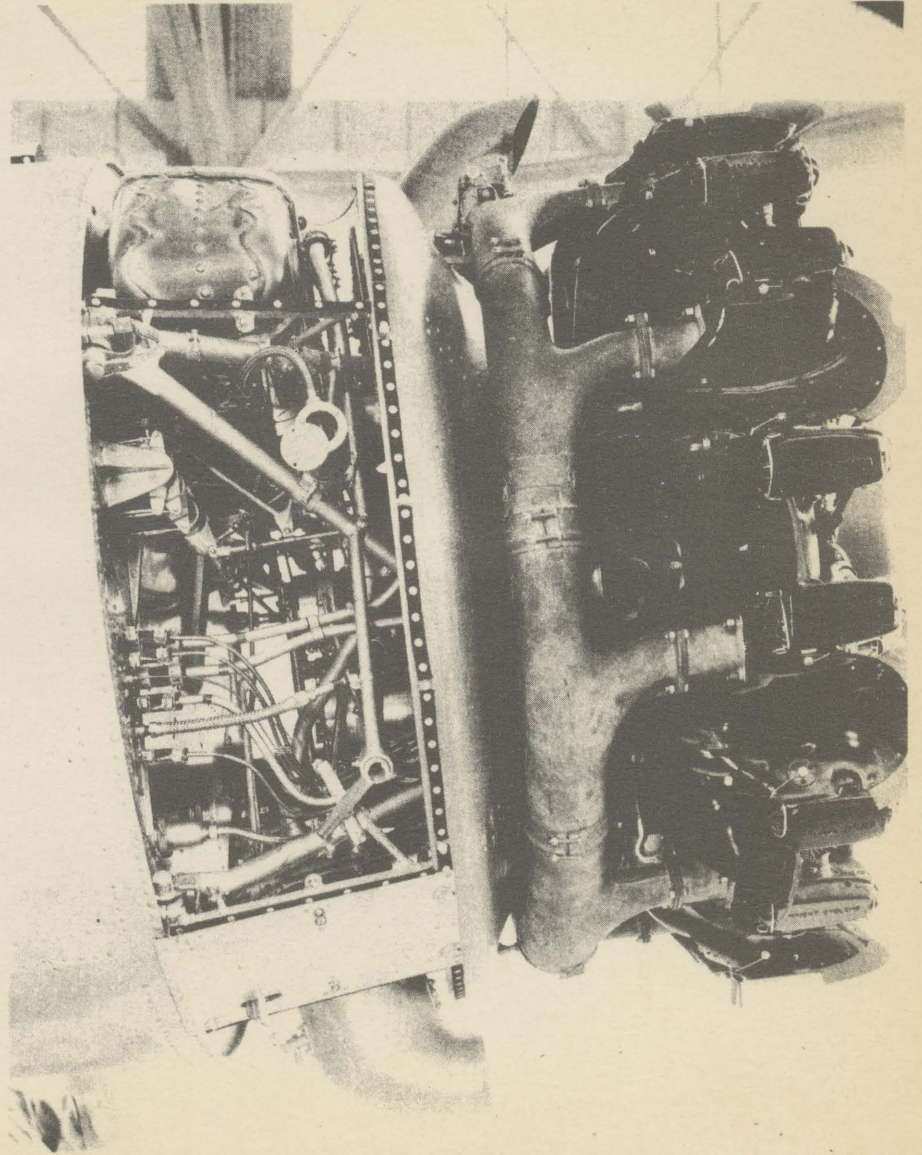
LEFT HAND ENGINE SECTION, RIGHT SIDE
